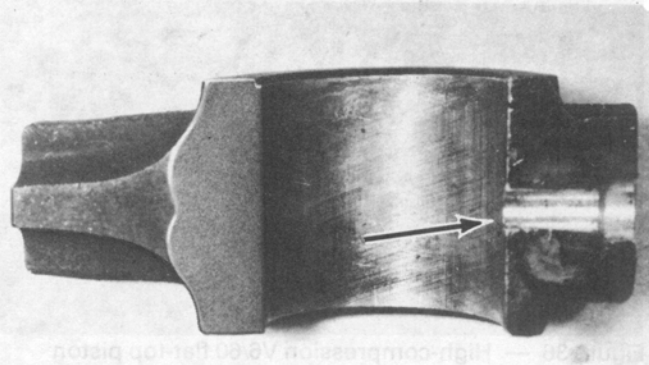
Oil hole in top of connecting rod lubricates full-floating wrist pin.
